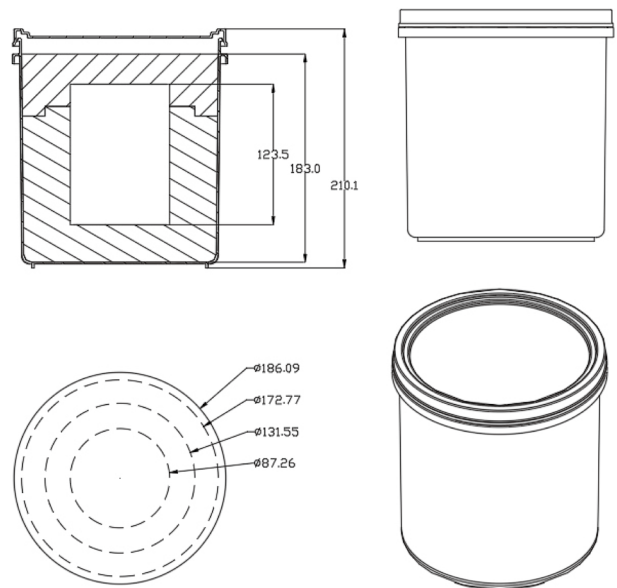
Drawing of ¹³¹I mIBG cushioning container.
